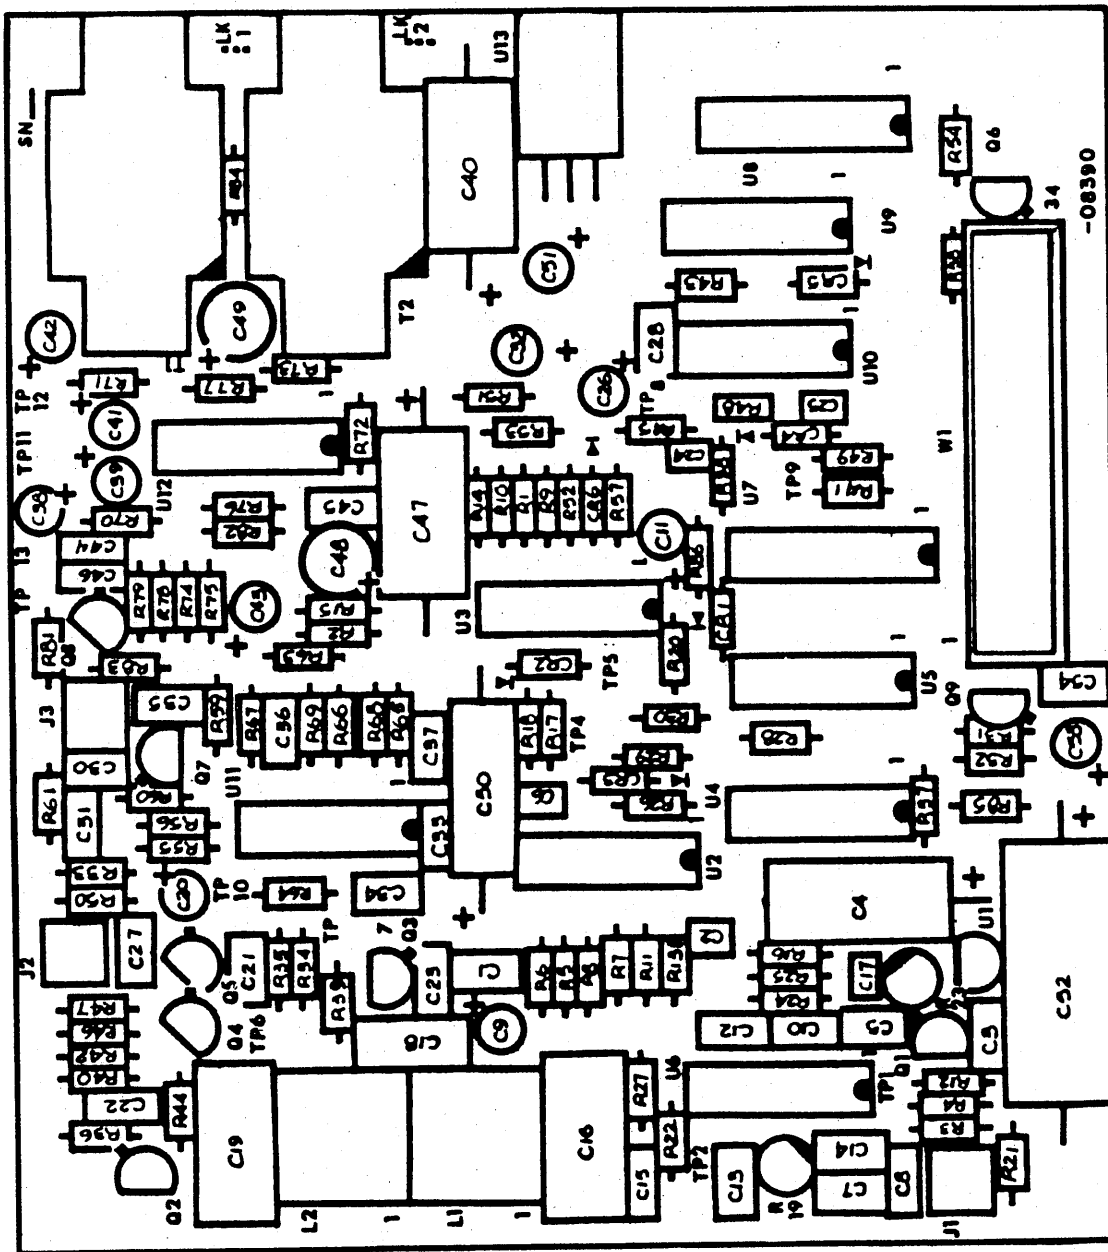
ISB Circuit Card Assembly (A5) Component Location Diagram
